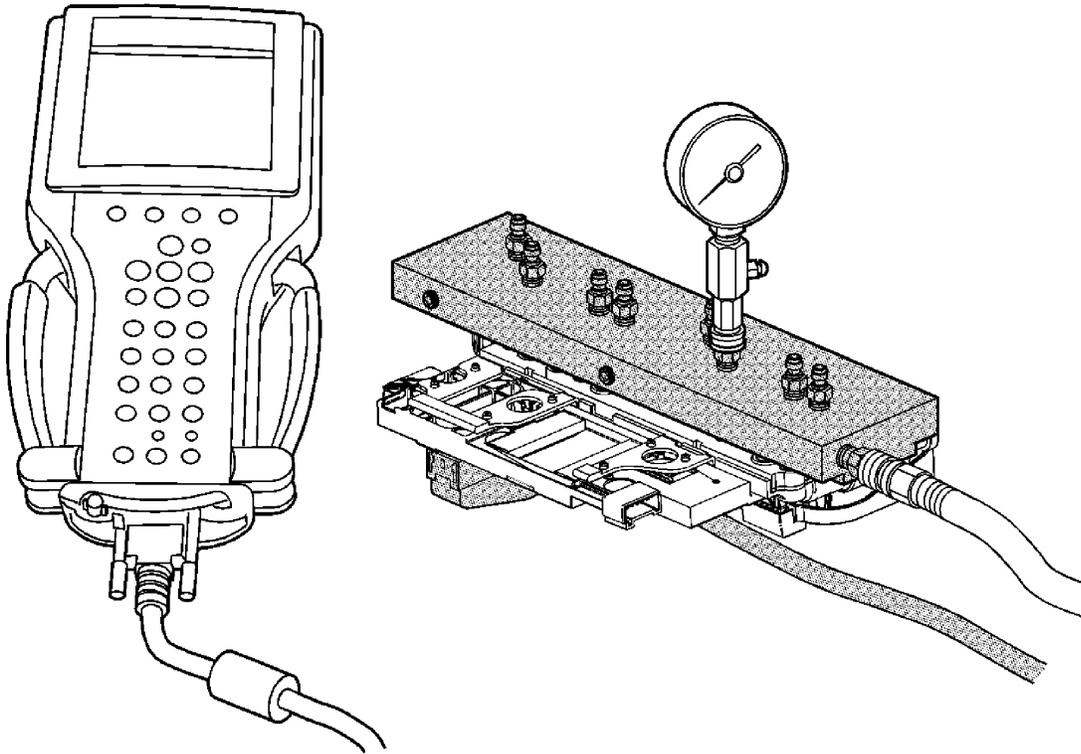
Identifying Special Tool -- DT-47825-100
